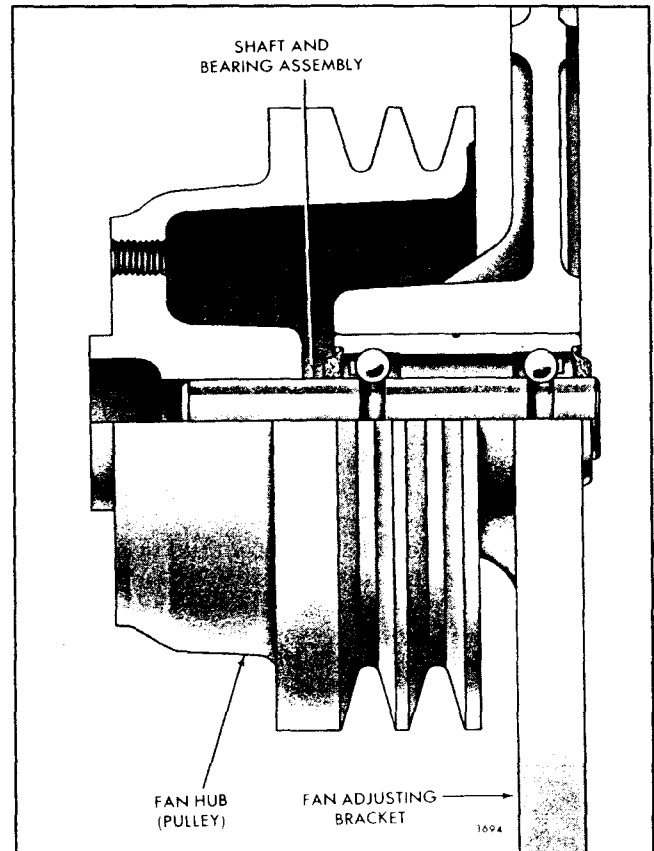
Former Fan Hub Assembly (In-Line Engine)
